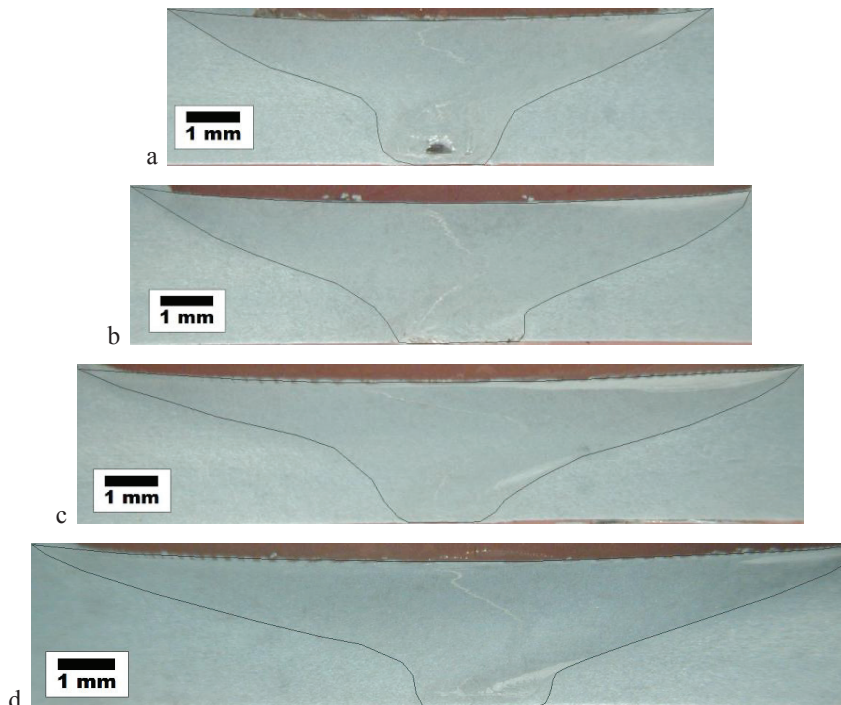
Macrograph of FSW welded specimens: (a) D10; (b) D12; (c) D14; (d) D16.
